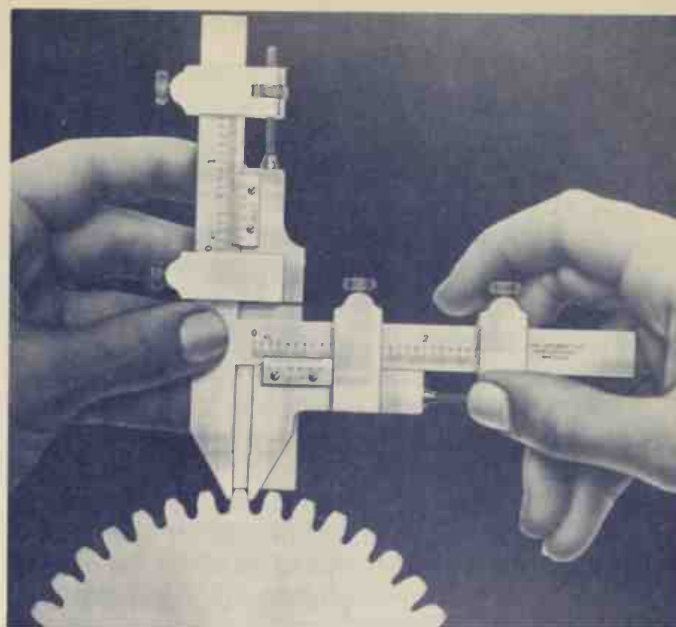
and 16-24 show a gear tooth vernier caliper and how it is used.
